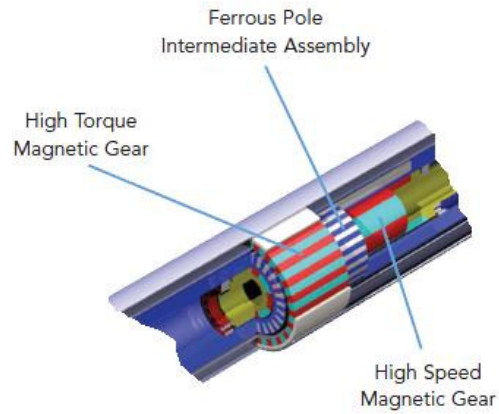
Radial Flux Magnetic Gear [33]. This figure shows a CAD model of a radial flux magnetic gear.
